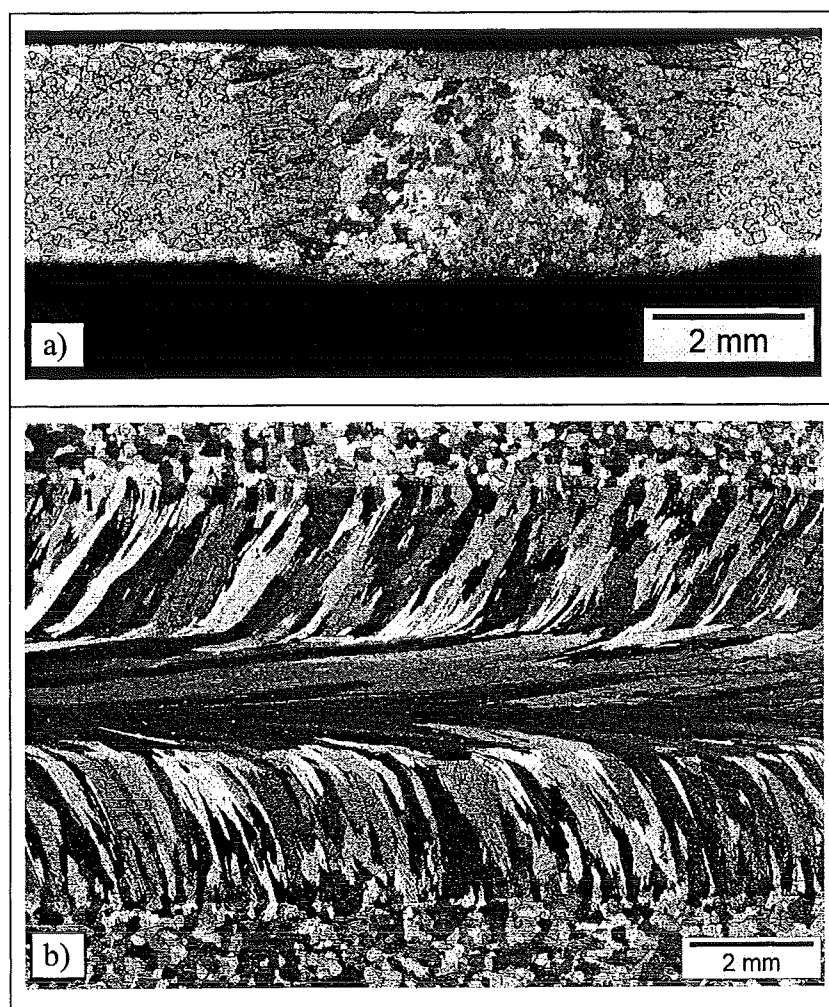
Photomicrograph of fully penetrated straight bead on plate weld in AA 6060-T6 unstirred ( $I = 80$  A,  $v = 4$  mm/s), showing a) transverse cross-section and b) top view.
